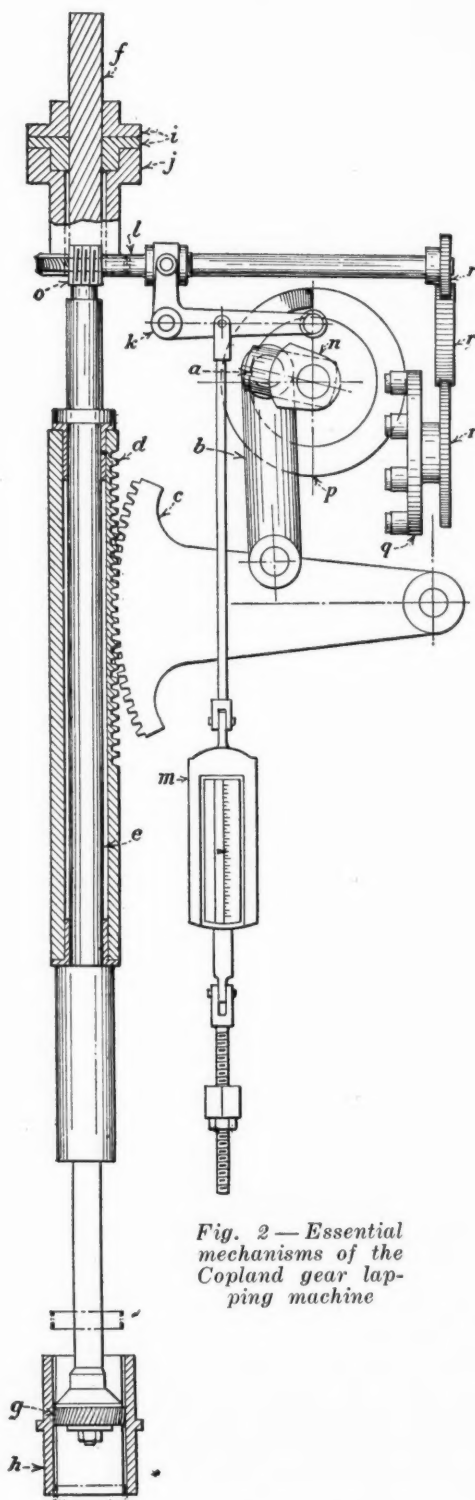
Essential mechanisms of the Copland gear lapping machine
